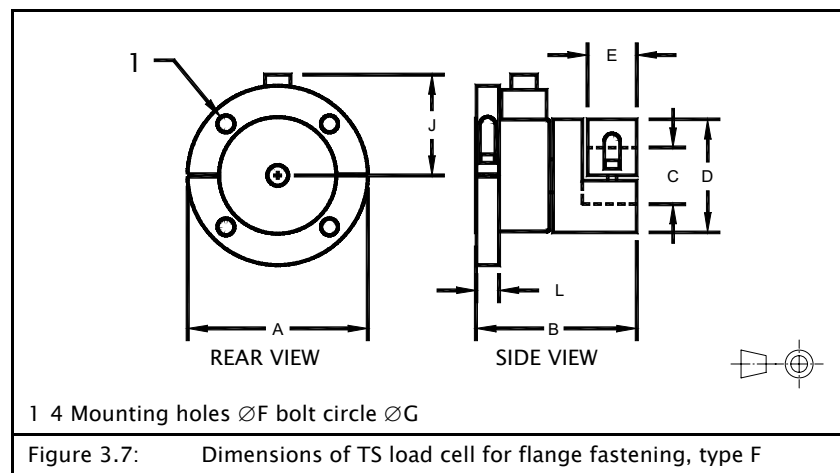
Dimensions of TS load cell for flange fastening, type F
